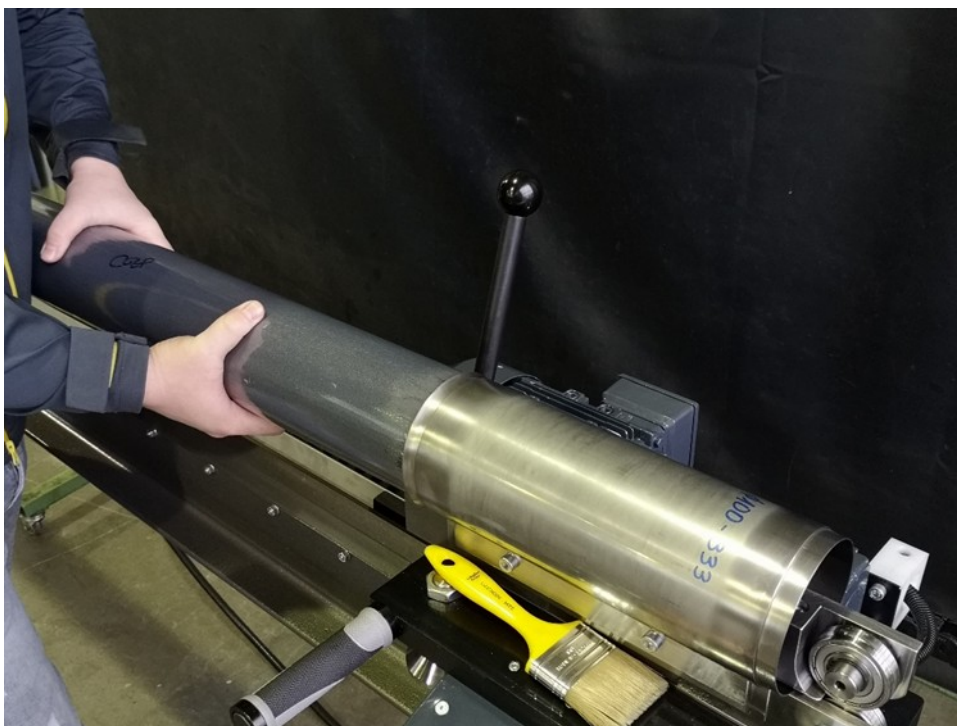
While positioning the pipe, make sure that the gearbox lever is in vertical position (the center carriage is locked in place)
